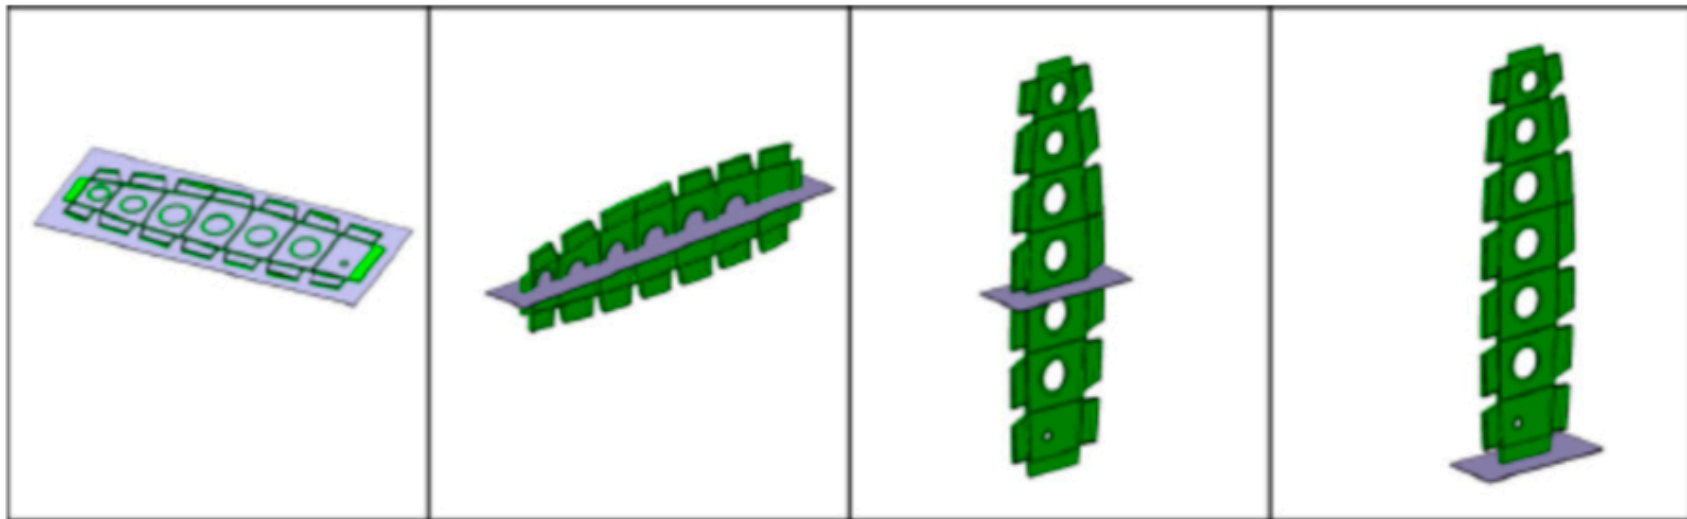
Examples of unidirectional (far right) and bi-directional build orientations along the three planes of symmetry for a wing rib. Based on [116]. Images courtesy of the Welding Engineering and Laser Processing Centre at Cranfield University.
